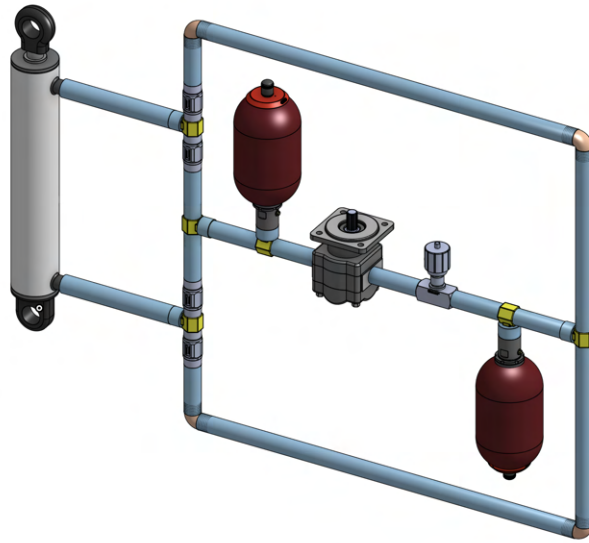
Isometric view of the CAD model of the hydraulic PTO.
